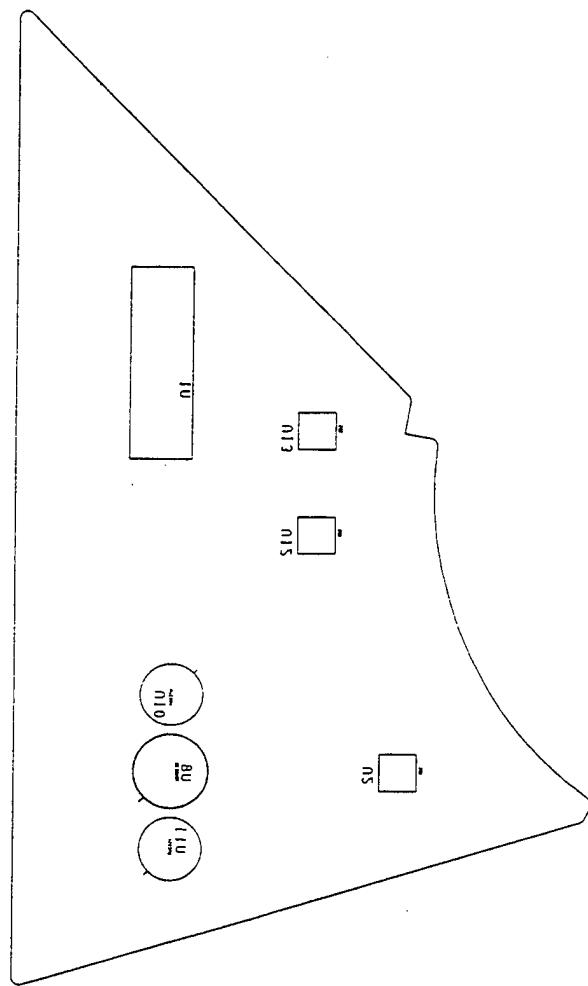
RF LNA PCB - Bottom Assembly Drawing
